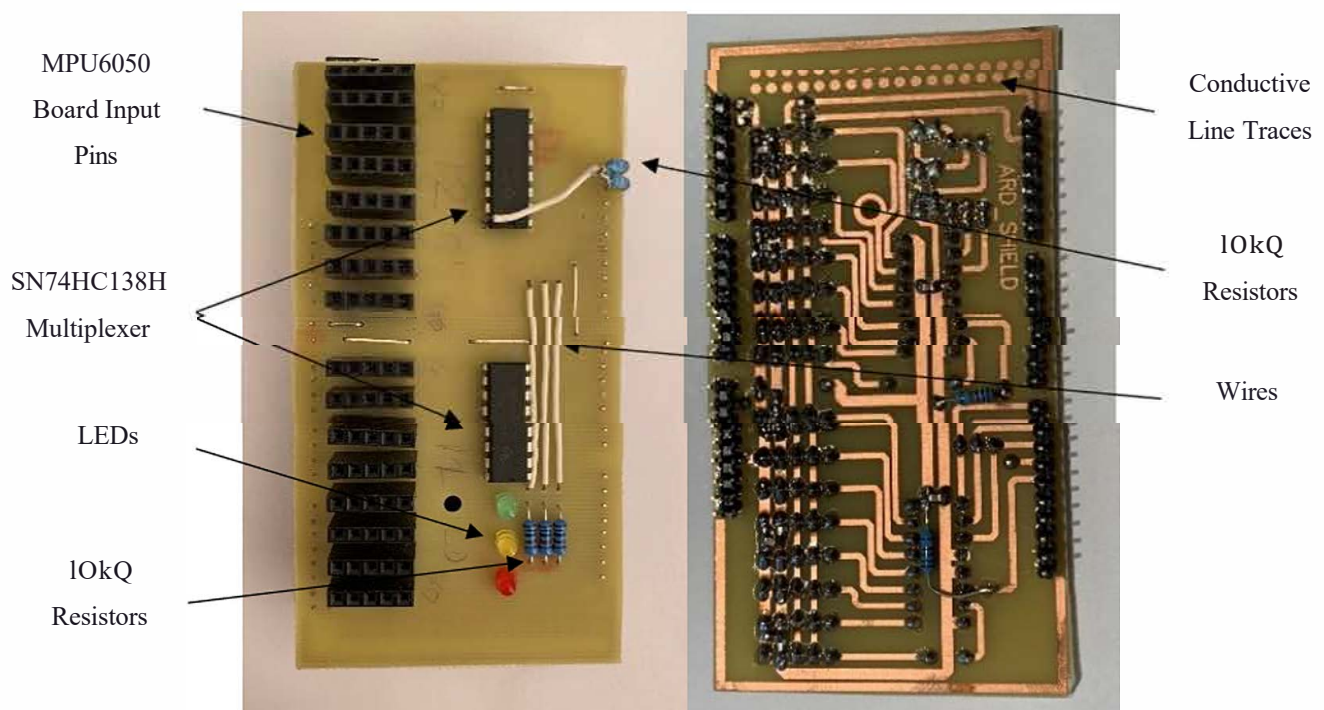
Design of modified PCB Board: Top View (Left) & Bottom View (Right)
